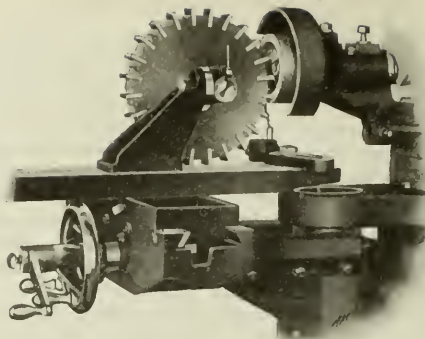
Sharpening Faces of Inserted-tooth Milling Cutter
